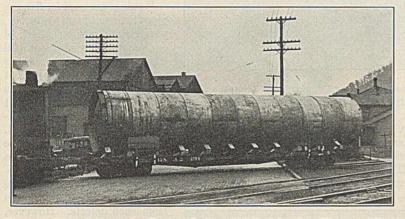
Riveted Absorption Tower. Enduro "A" Stainless Iron Plates and Rivets Fabricated by Struthers-Wells Co., Warren, Pa.
